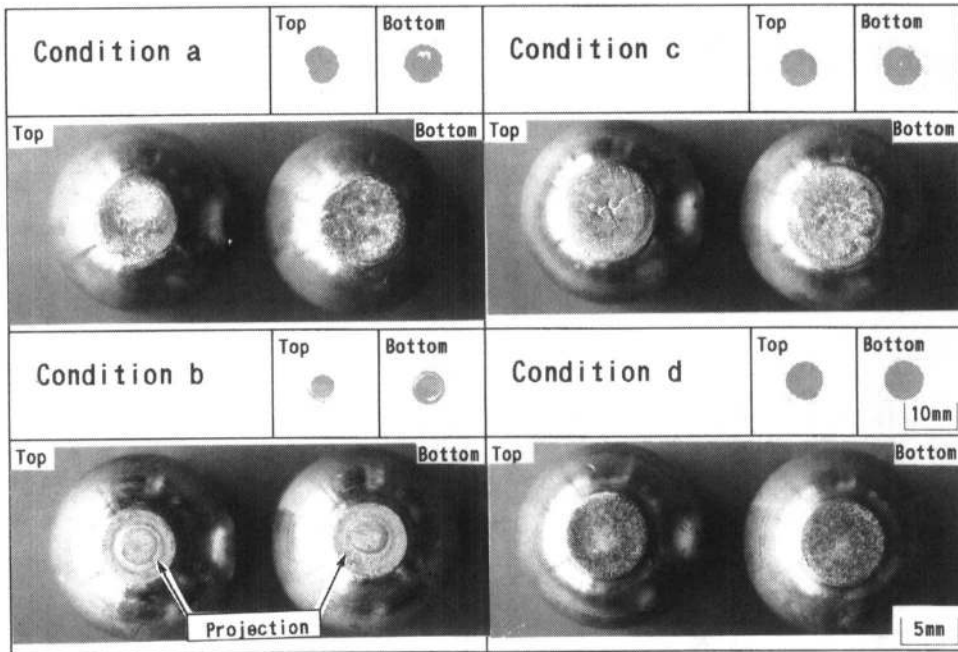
Electrode tip end surface conditions after spot welding.
